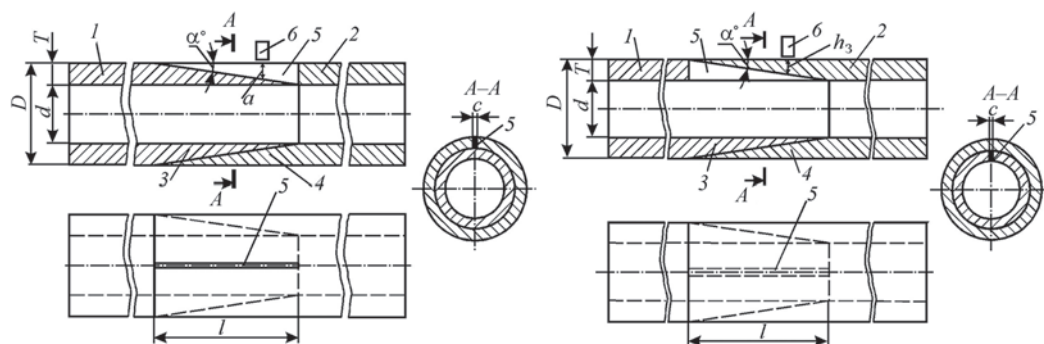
Composite RS for simulation of surface (*a*) and subsurface (*b*) cracklike defects in cylindrical TO: 1, 2 — RS parts; 3, 4 — conical end sections of RS part; 5 — defect on the outer (*a*) and inner (*b*) conical sections; 6 — ECP
